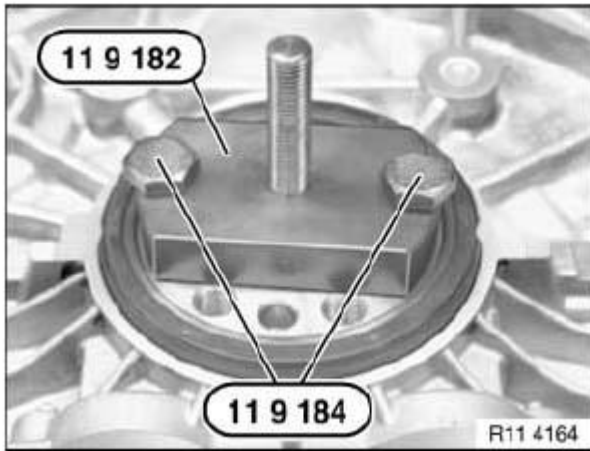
Identifying Special Tool (11 9 182) And (11 9 184)
